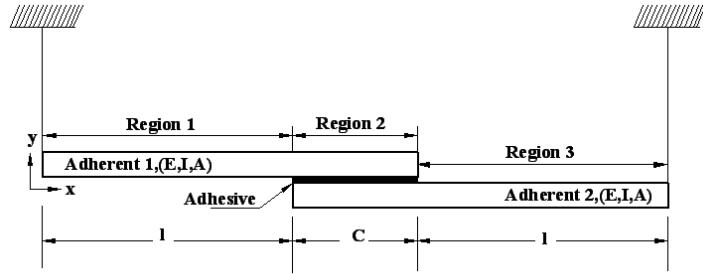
Schematic Model for a Single Lap Adhesive Joint
